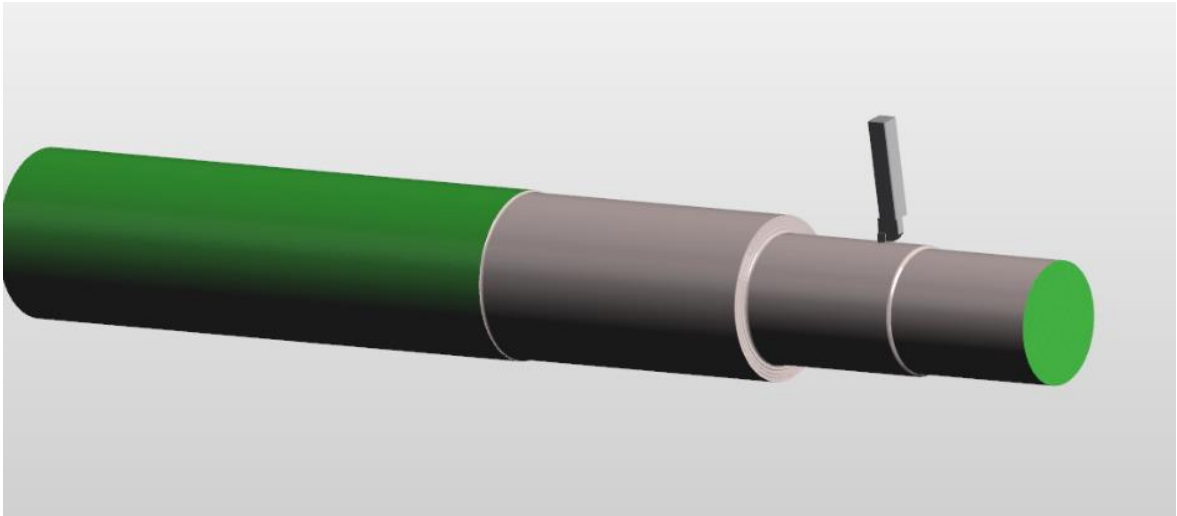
Workpiece and cutting tool in Edgcam 2018.
